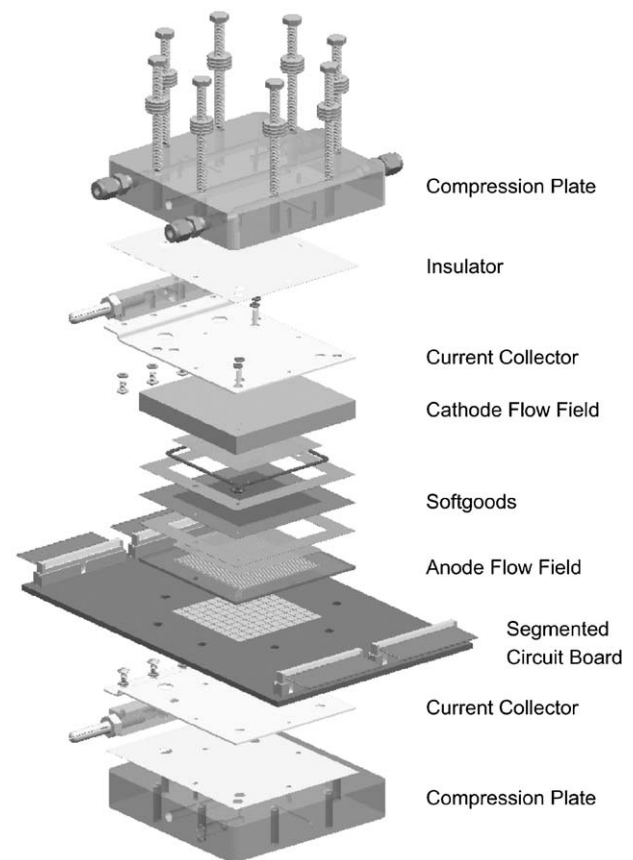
Exploded view of a segmented fuel cell assembly using the PCB approach. From Ref. [25] with permission.
